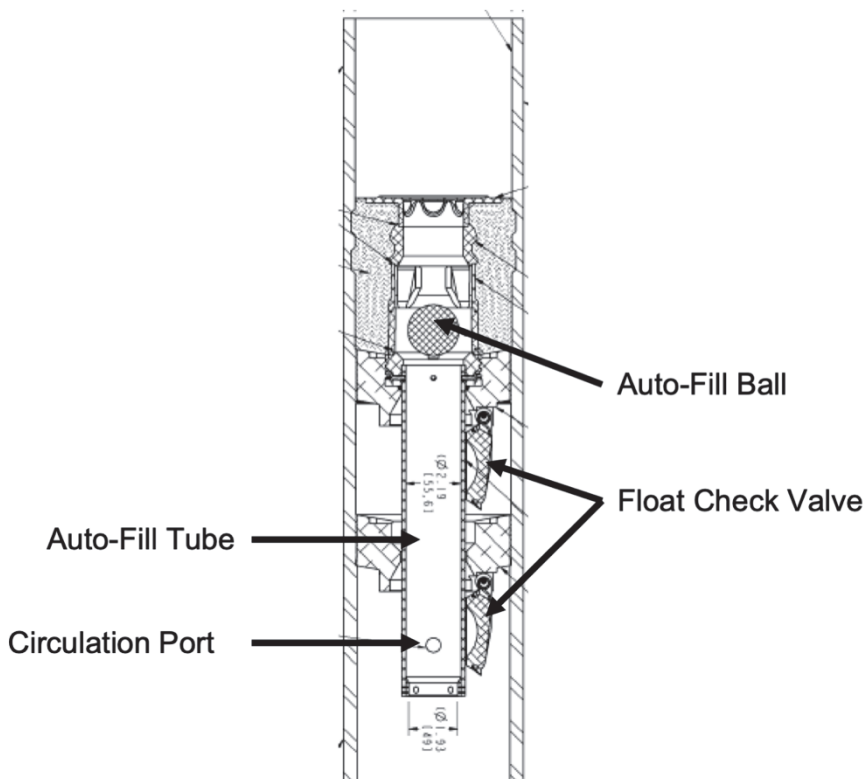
Auto-Fill Float Collar - Tube ID 2.19" (55.6 mm) <sup>C.12</sup>
